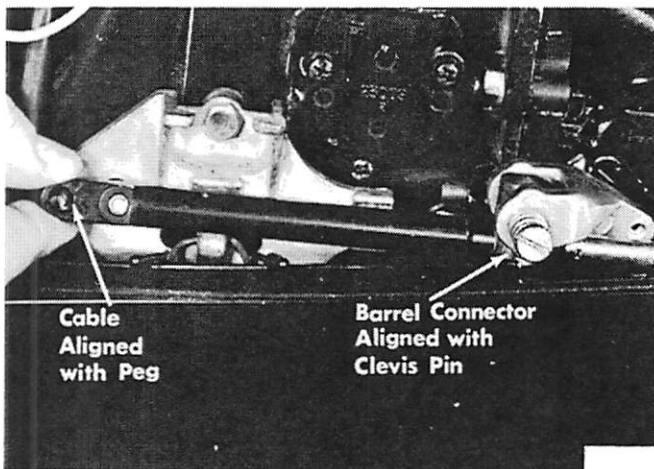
Adjusting Barrel Connector on Shift Cable - 1967
